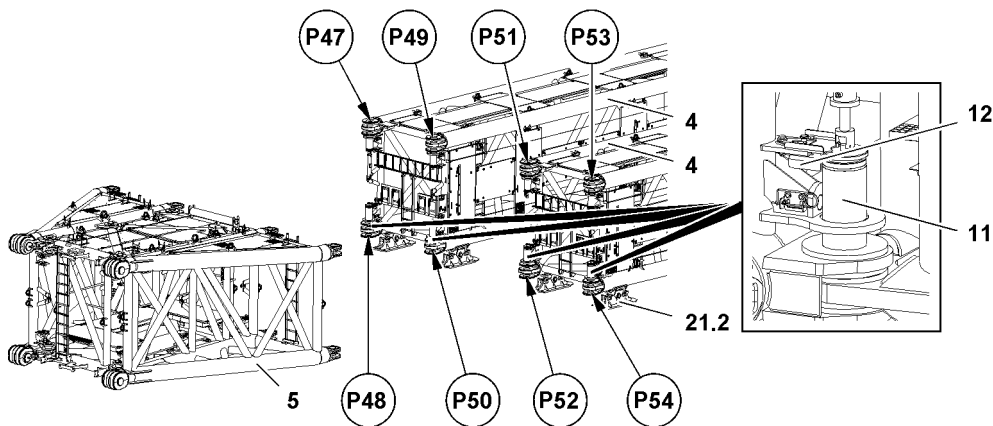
Assembling the upper P-adapter on the Li-intermediate sections - Pin points
